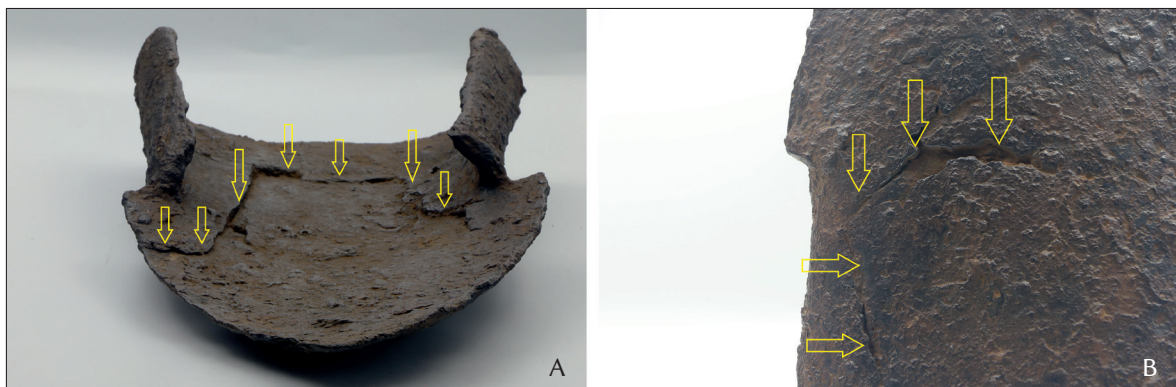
Traces of forge welding on the surface of iron ploughshare (photo by K. Tankó)
